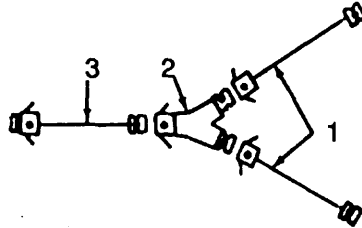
Wye Fitting Assembly, Removal/Installation.
